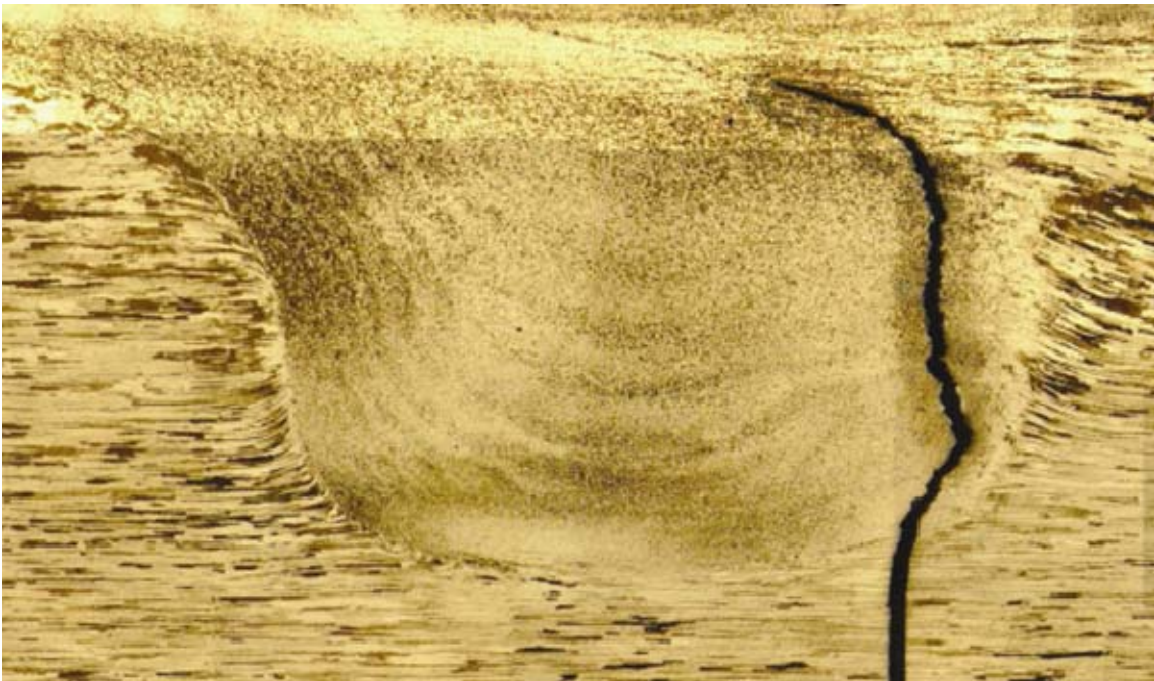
Transverse View of Anodized to Unanodized Al-Li alloy, weld location on the retreating side with a standard tool. (sample 1077)
